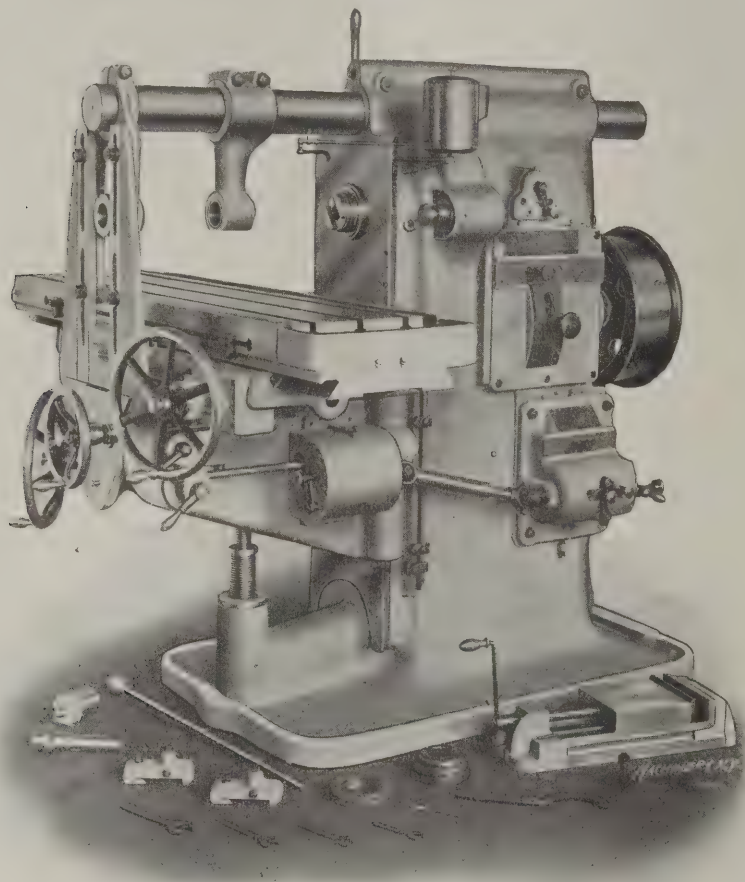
Brown & Sharpe No. 4B Plain Milling Machine.
